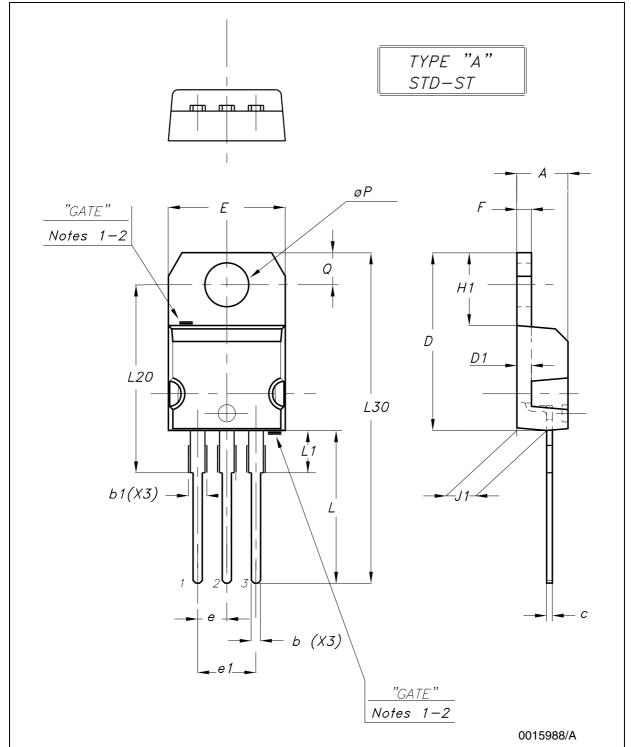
Drawing dimension TO-220 (type STD-ST Dual Gauge)
